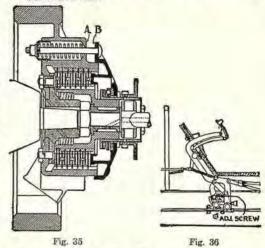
Clutch assembly. When the disks are worn out, surface (A) touches surface (B).
